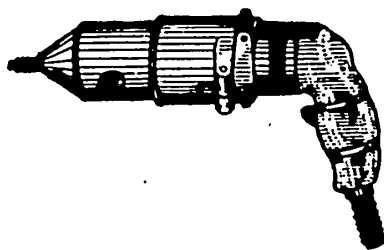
Guiding Device of Type KN-1, Attached on Hand Drill
